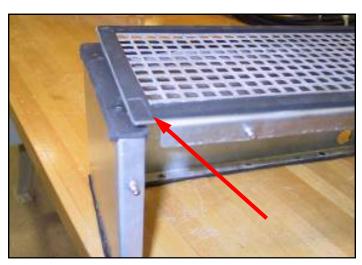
Gasket folds over the edge to form seal between the duct and top vented cover
